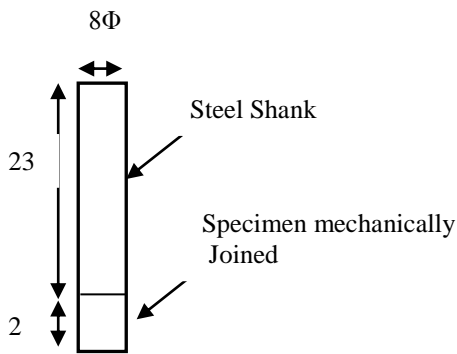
Wear testing specimen (all dimensions in mm)
